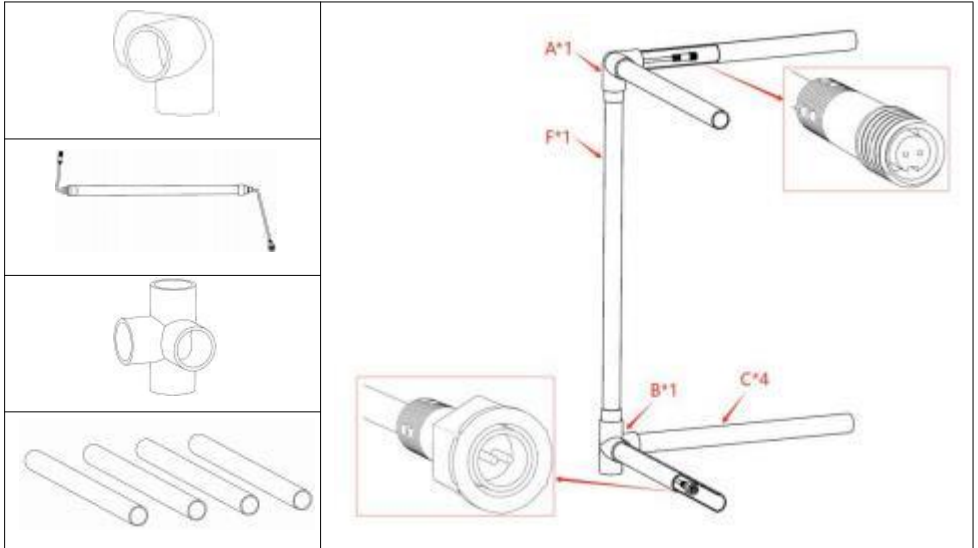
According to the figure, assemble four transverse tubes with length of 355MM, one 4-pass, one 3-pass and one lamp together for backup (Note: the lamp wire is in the outlet hole of 3-pass and 4-pass).
